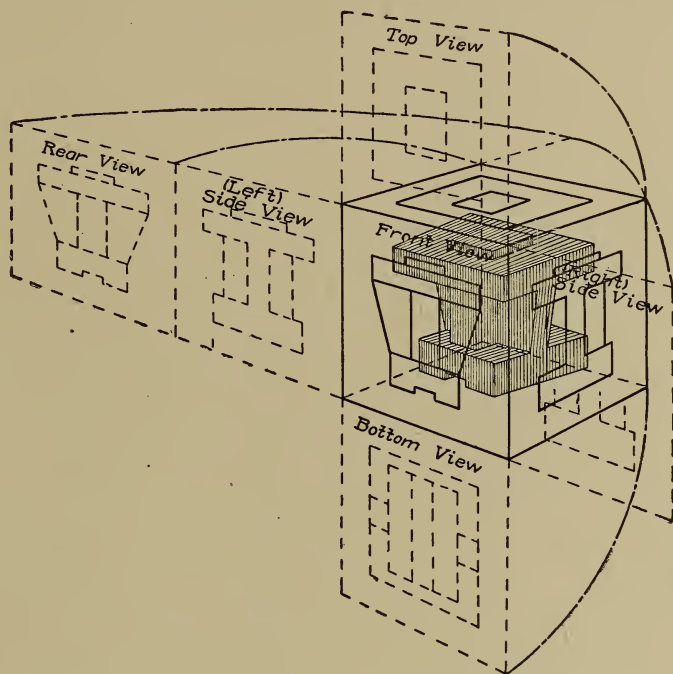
Folding Out of the Projection Planes Into the Plane of the Surface of the Drawing Paper
